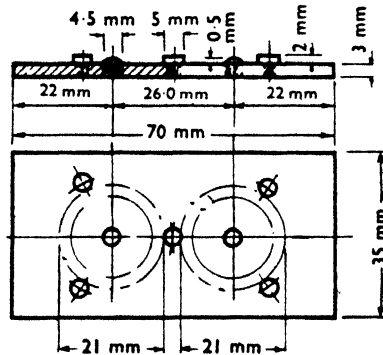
Ring and Ball Test for Pitch.—Moulding Plate.
